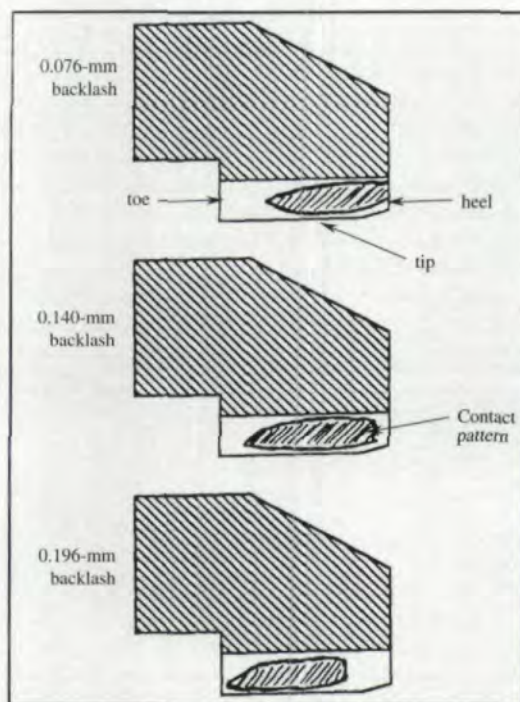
Effect of face-gear shimming and backlash on tooth contact pattern (test side face gear).
